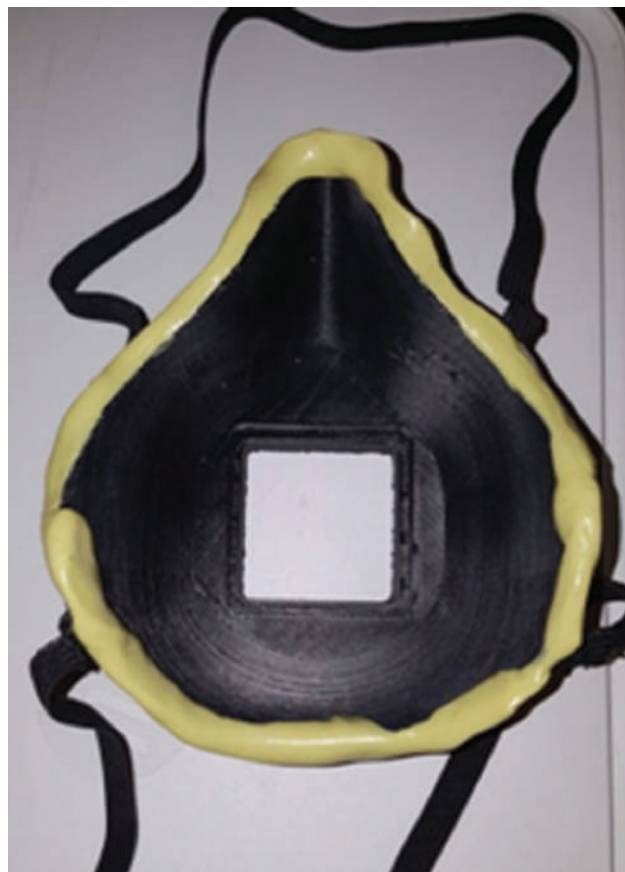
Additional fixing of the cover using office tacks and addition of a heavy silicone flexible seal to the Lowells Makes mask printed in PLA
